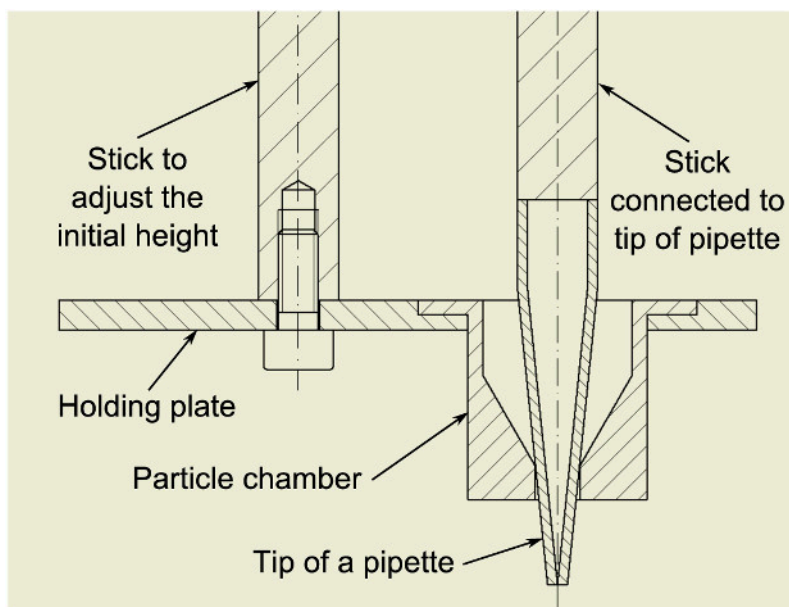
Release mechanism with particle chamber and tip of a pipette. This figure describes the newly developed release mechanism for vacuum experiments. Firstly, the plate holding the cylindrical chamber with a conical drill hole can be seen. In addition, the two sticks for the adjustment of a variable initial height and the connection to the conical tip of a pipette are presented. [Please click here to view a larger version of this figure.](#)
